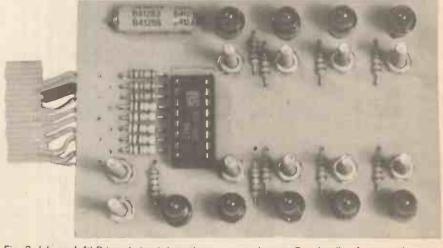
(above left) Printed circuit board component layout. For details of connections to the computer refer to the circuit diagram. (left) The full size printed circuit master pattern. This board is available from the *EE PCB Service*—see page 172. (above) The completed board showing the connecting terminals (TL) and the l.e.d. indicators.
